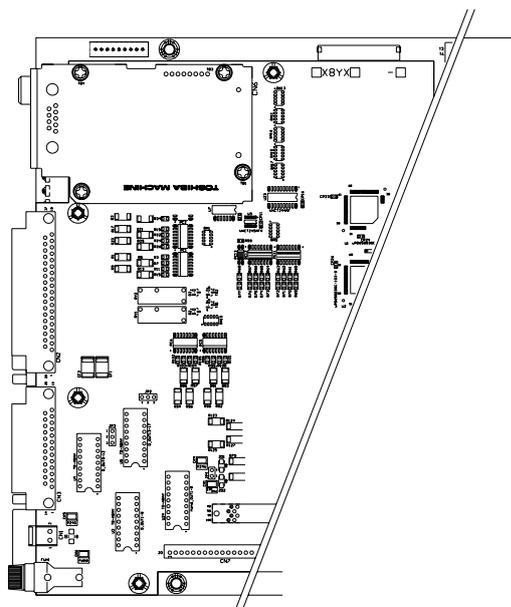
TSL3000 Robot Controller Side Panel (After Installation of Field Bus Printed Board)
